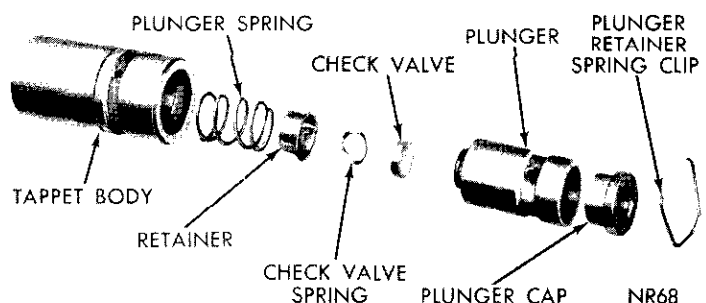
Hydraulic Tappet Assembly (Disassembled View)
